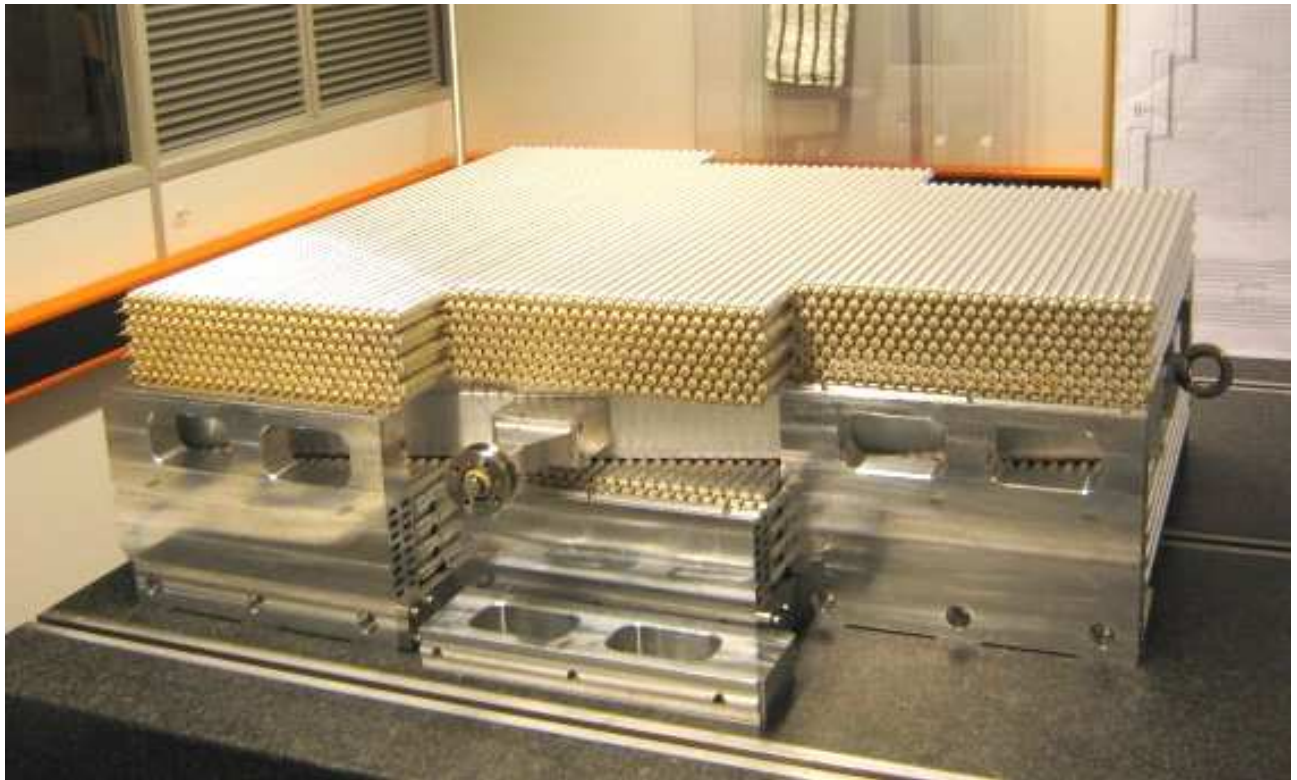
The small tube prototype chamber after assembly, consisting of two packages of 8 tube layers, with 72 tubes per layer and 1152 tubes in total.
